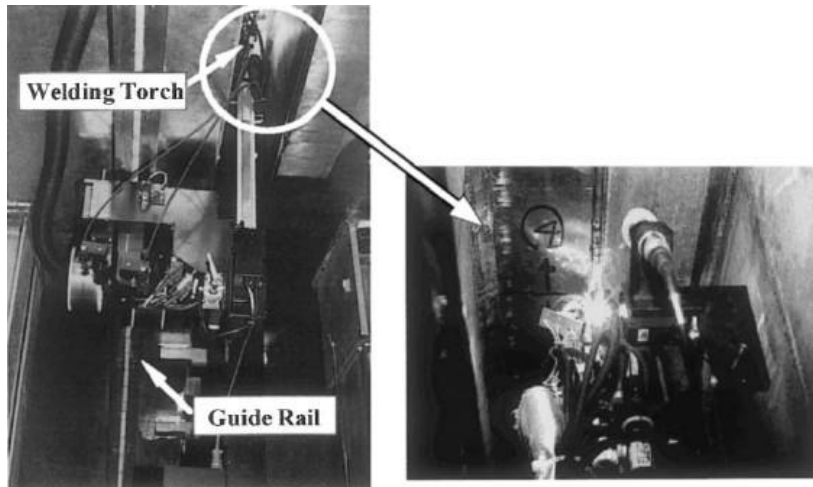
Closure welding for the two sections of the ITER full-size vacuum vessel (Koizumi, 2001)
